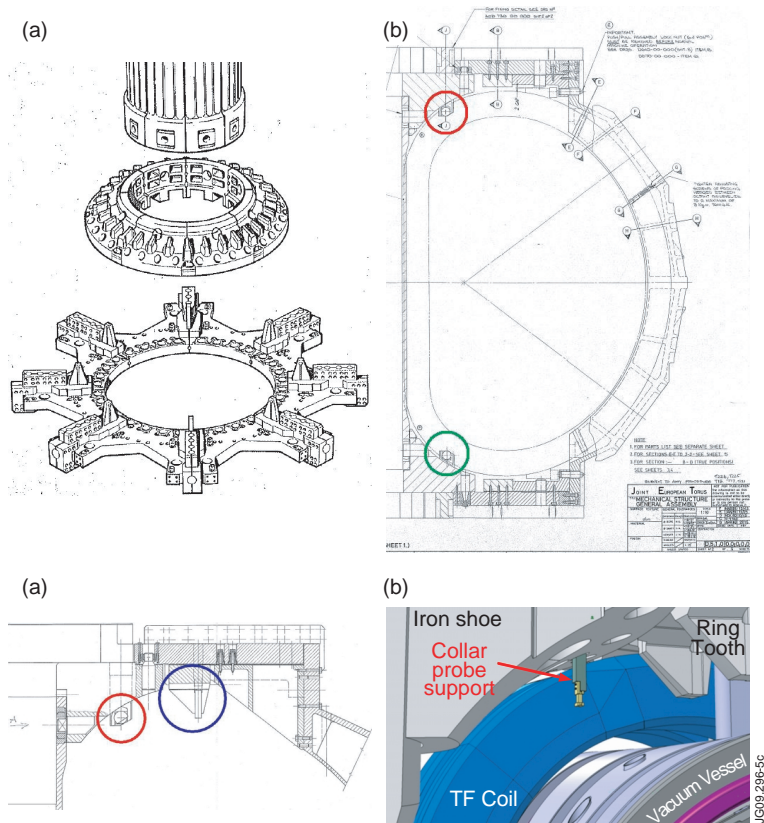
(a,b) Illustration of selected parts of the JET mechanical structure. (c,d) Particular and CAD model
